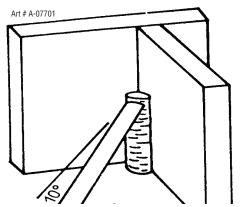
Single Run Vertical Fillet Weld
